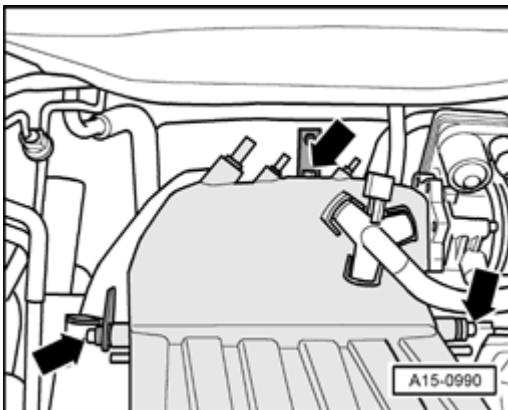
Removing Hose Bracket & Securing Bolts For Intake Manifold
